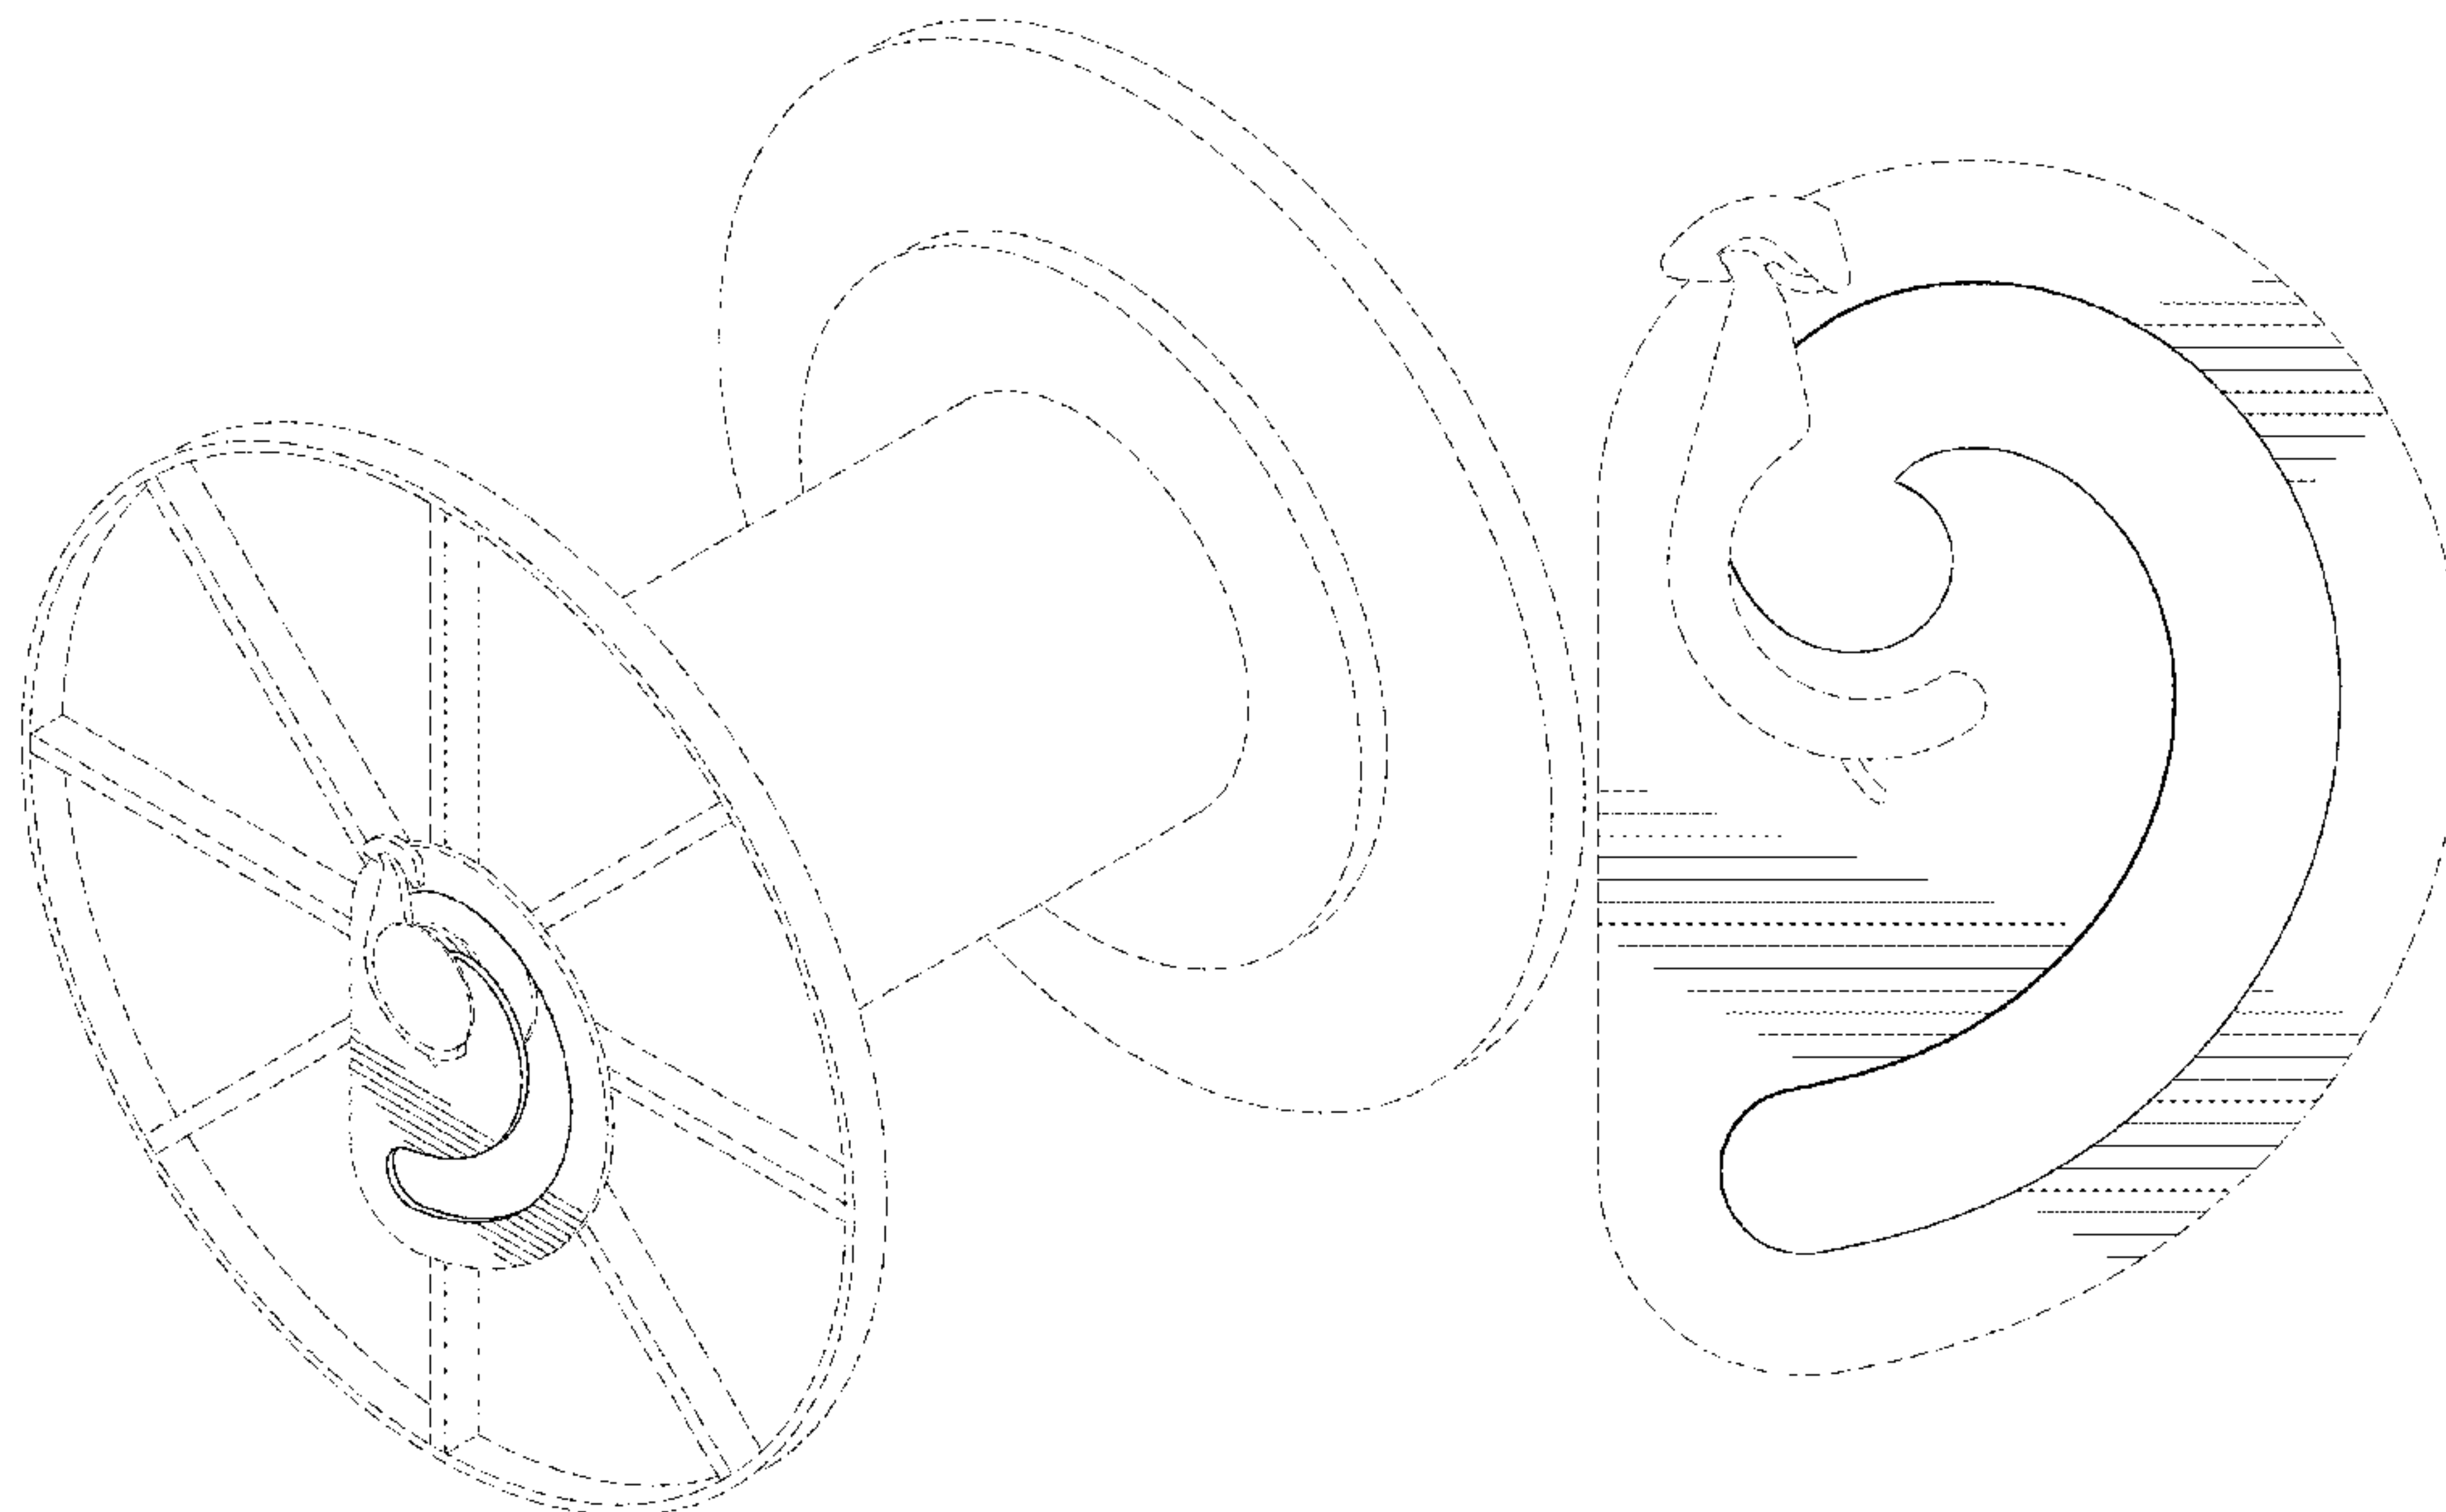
is a perspective view of the flange of FIG. 1, shown
